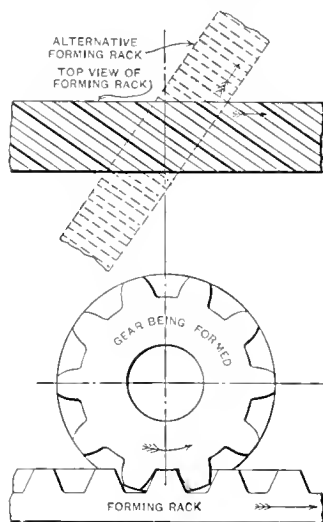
A Rack with Teeth set on an Angle, Operating by Impression on the Molding-Generating Principle, to form Teeth in a Helical Gear; compare with Fig. 7.
